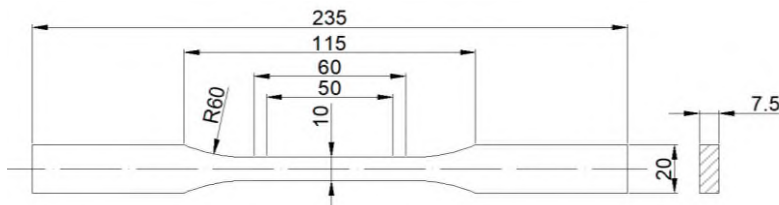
Shape and dimensions of samples for static tensile tests [15]
